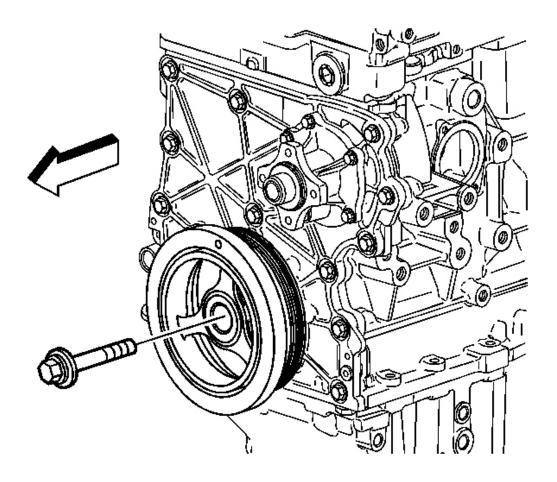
View Of Crankshaft Balancer Bolt Courtesy of GENERAL MOTORS CORP.
